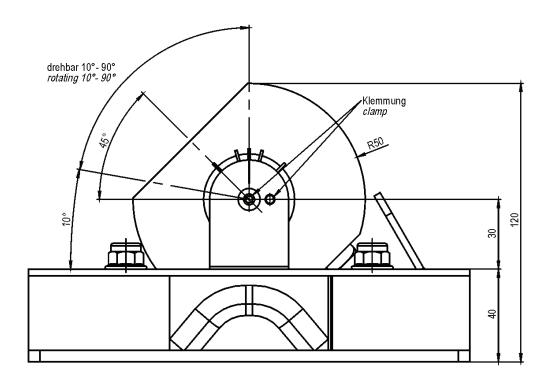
Dimensioned drawing hemisphere sensor Type NOS ø 40 mm
